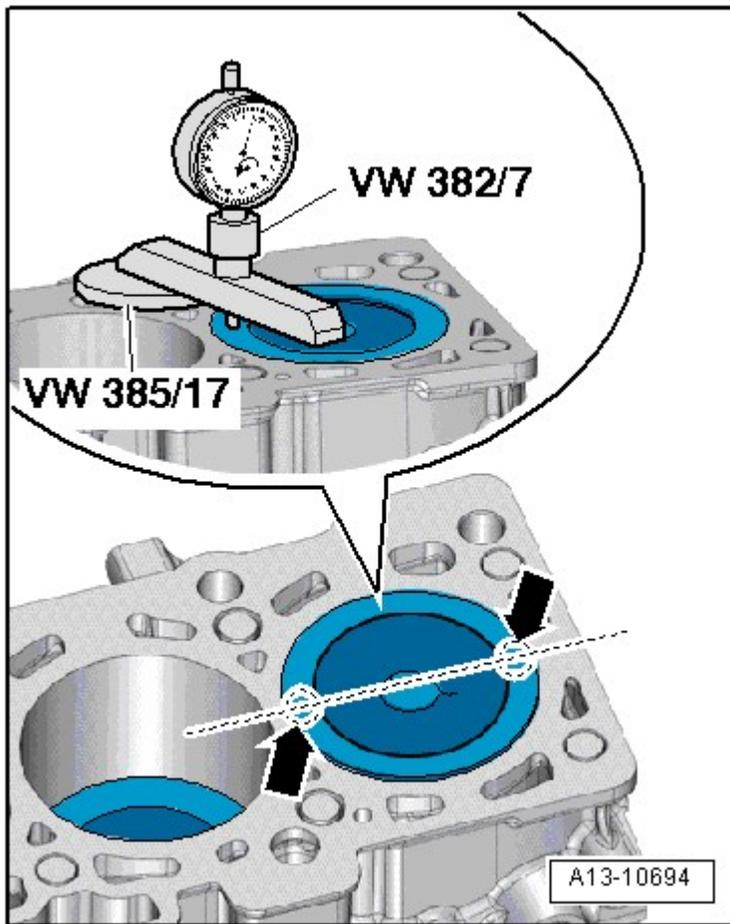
Identifying Measuring Bar VW 382/7 And VW 385/17 On Cylinder Block
